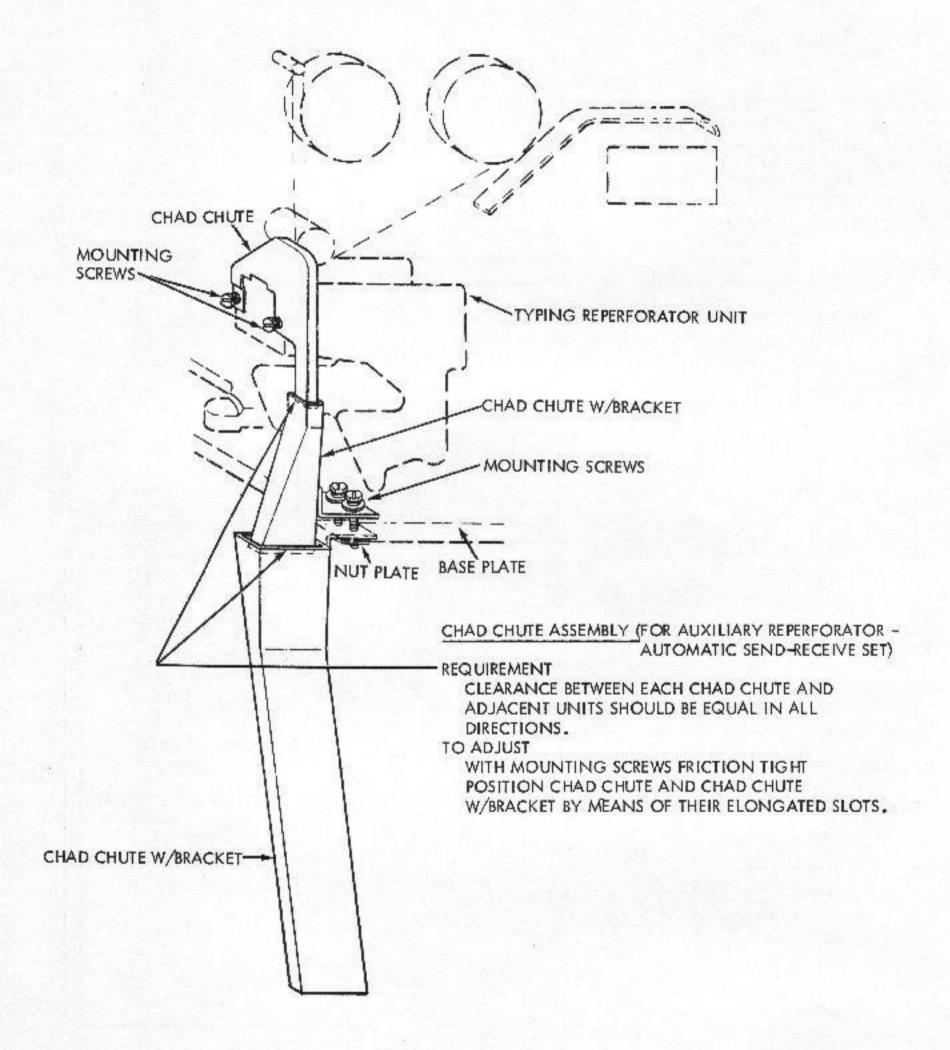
CHAD CHUTE ASSEMBLY FOR AUXILIARY
